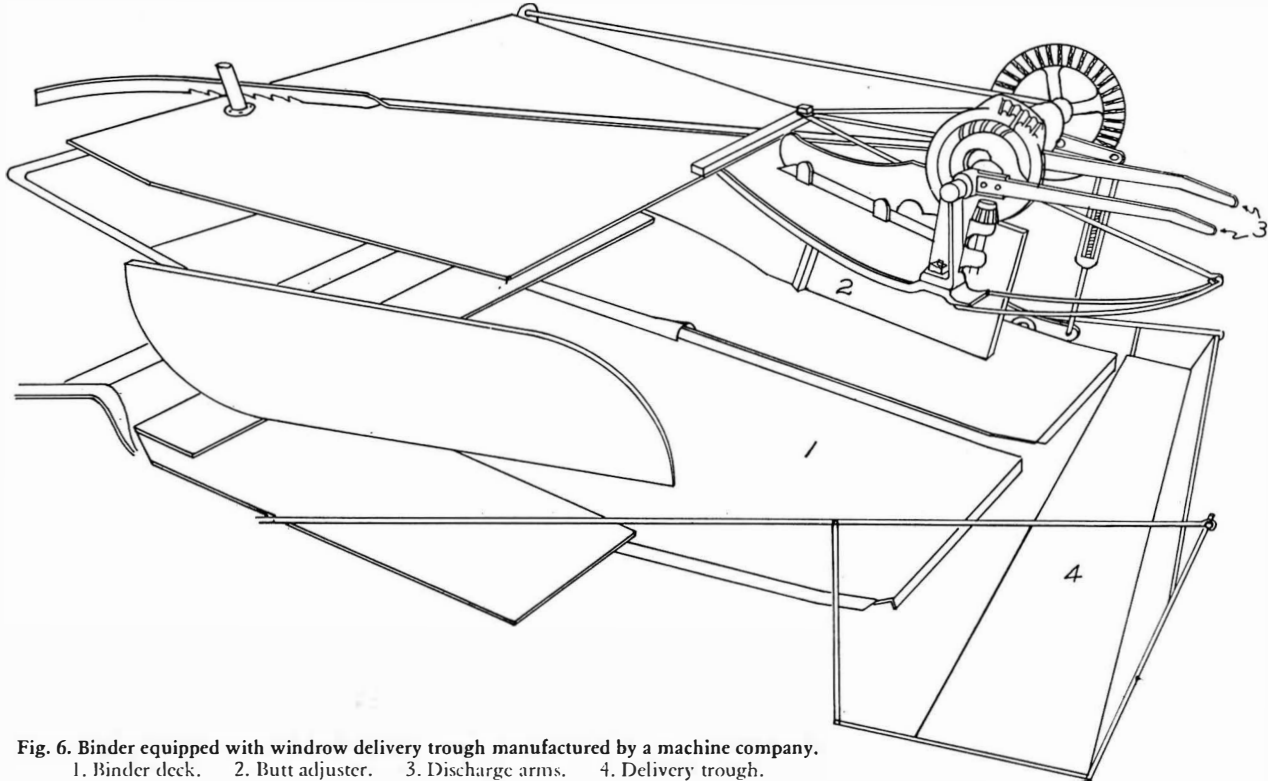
Binder equipped with windrow delivery trough manufactured by a machine company.
